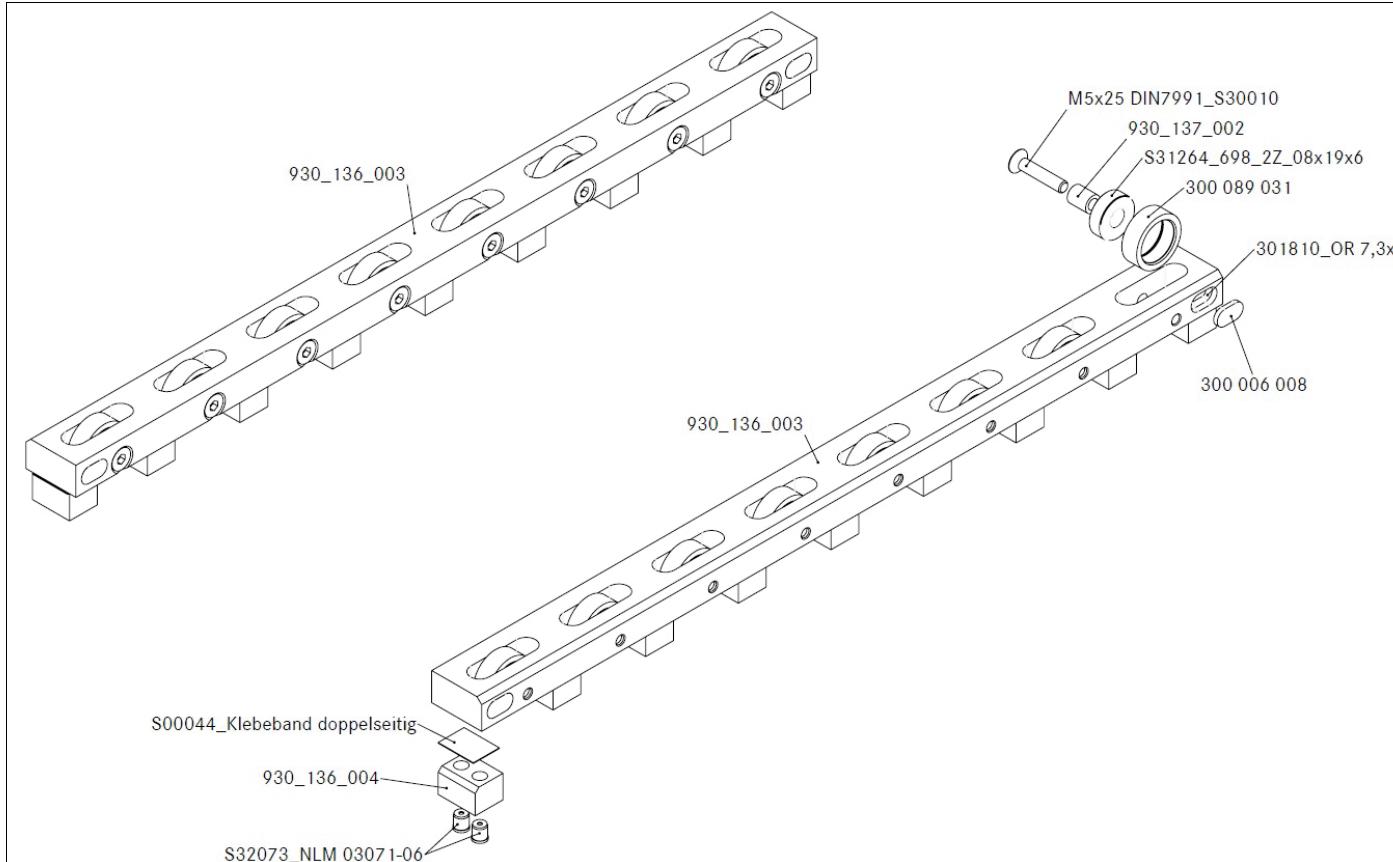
Spring loaded roller bar for ZE/ZED in roller section (UB320 PB160-400)
